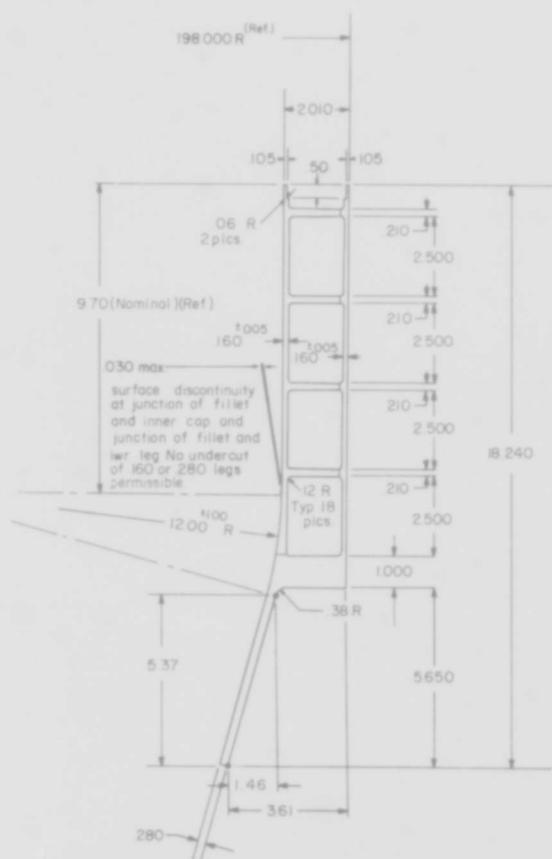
CROSS SECTION SHOWING DESIGN OF FINAL Y-RING STRUCTURE⁽⁶⁾
